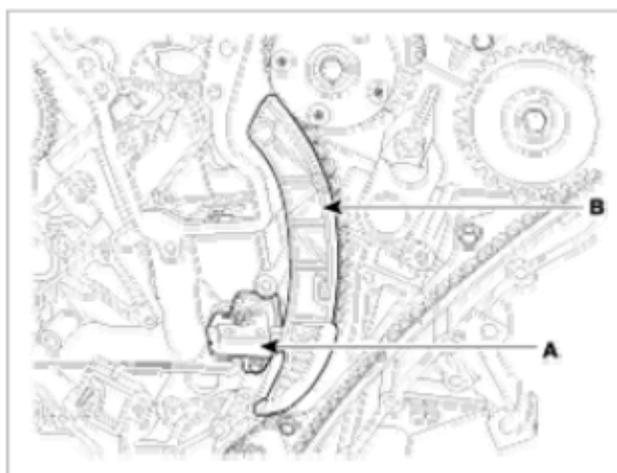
Locating LH Chain Tensioner And LH Timing Chain Tensioner Arm
